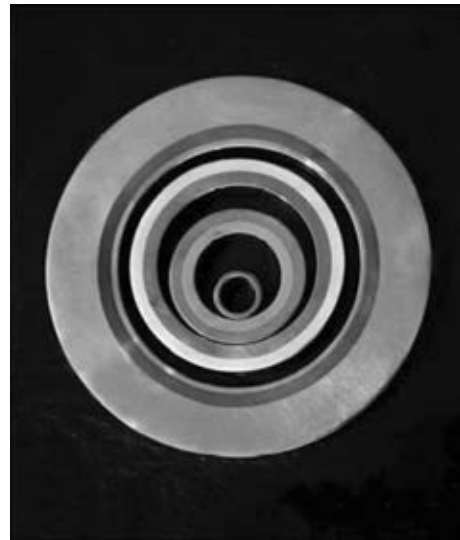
Explosion-welded two- and three-layer pipes
